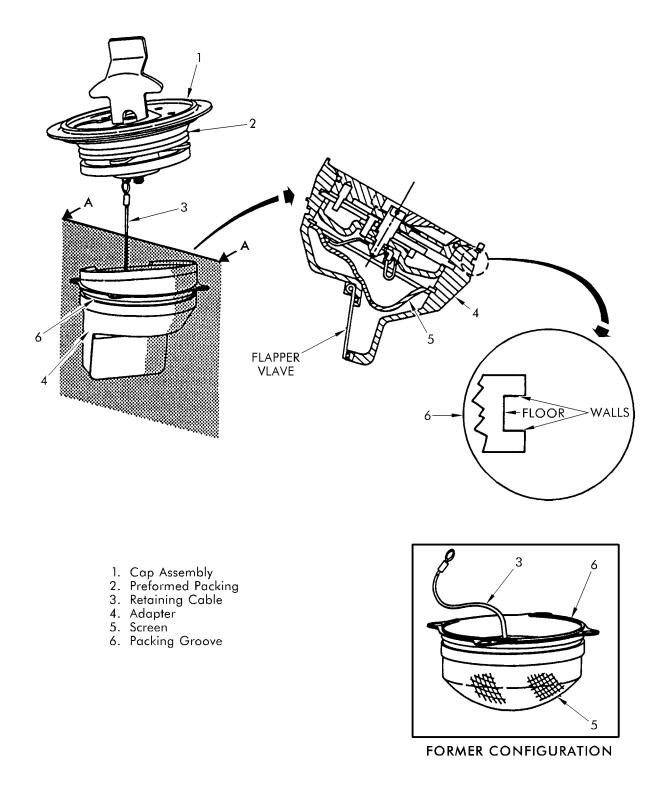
Oil Tank Cap and Adapter; Inspection
